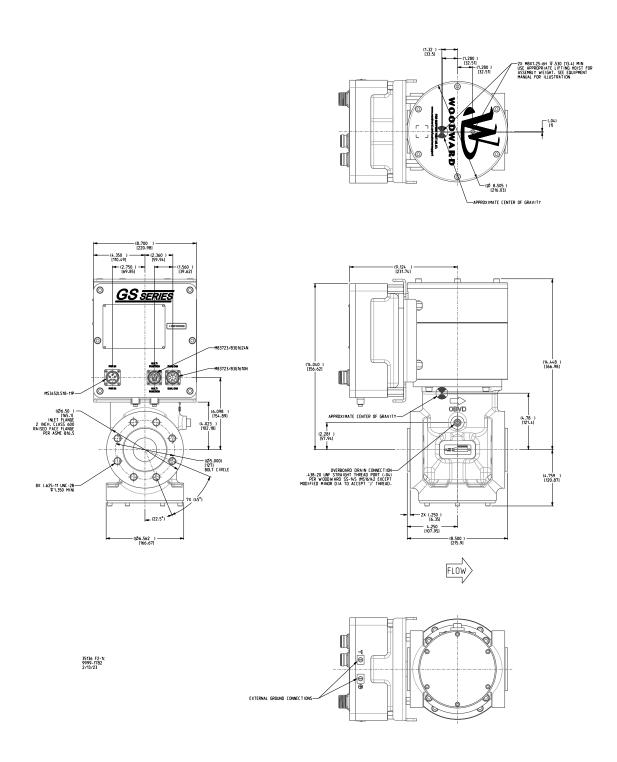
Outline Drawing Stainless Steel GS50 with Connectors
